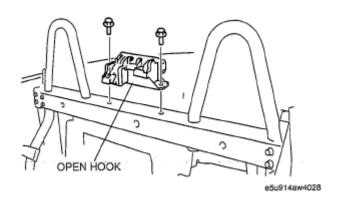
Identifying Open Hook Courtesy of MAZDA MOTORS CORP.
